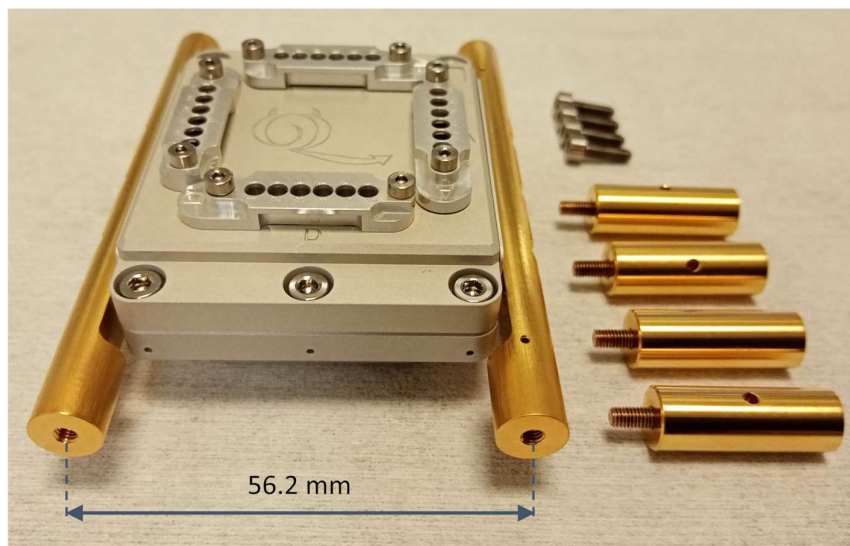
Mounting rods for out-of-plane mounting into M3 holes 56.2 mm apart.
